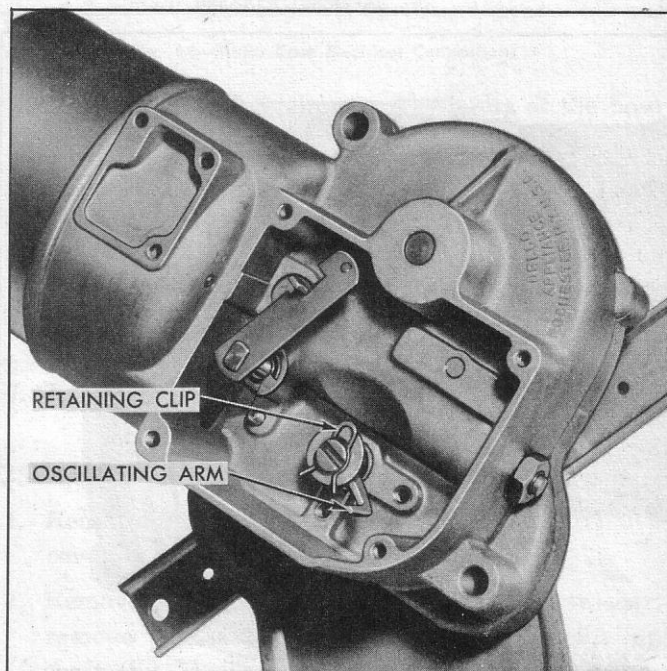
Oscillating Arm—Switch Removed for Clarity Only
